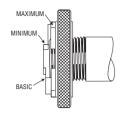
Checking major diameter truncation with 6 step plain ring gage.
